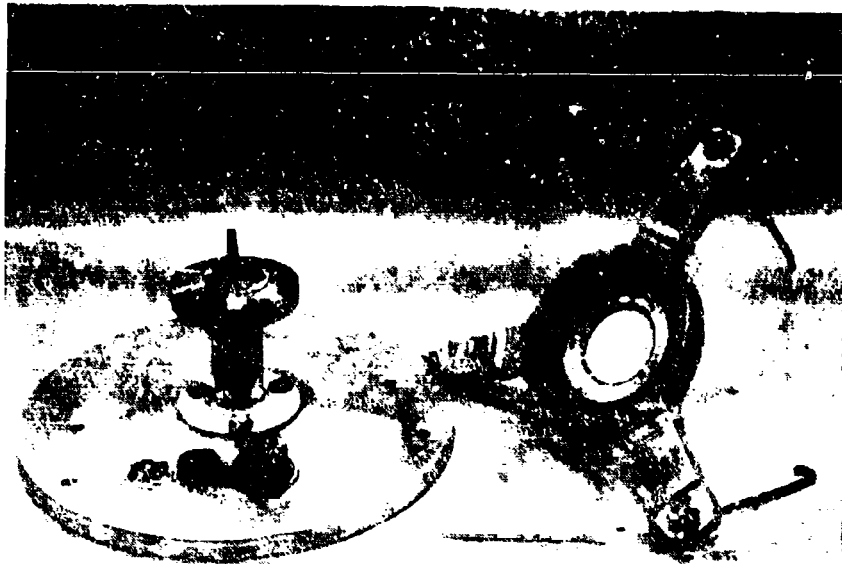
Fill or Drain Fitting Weld Fixture
